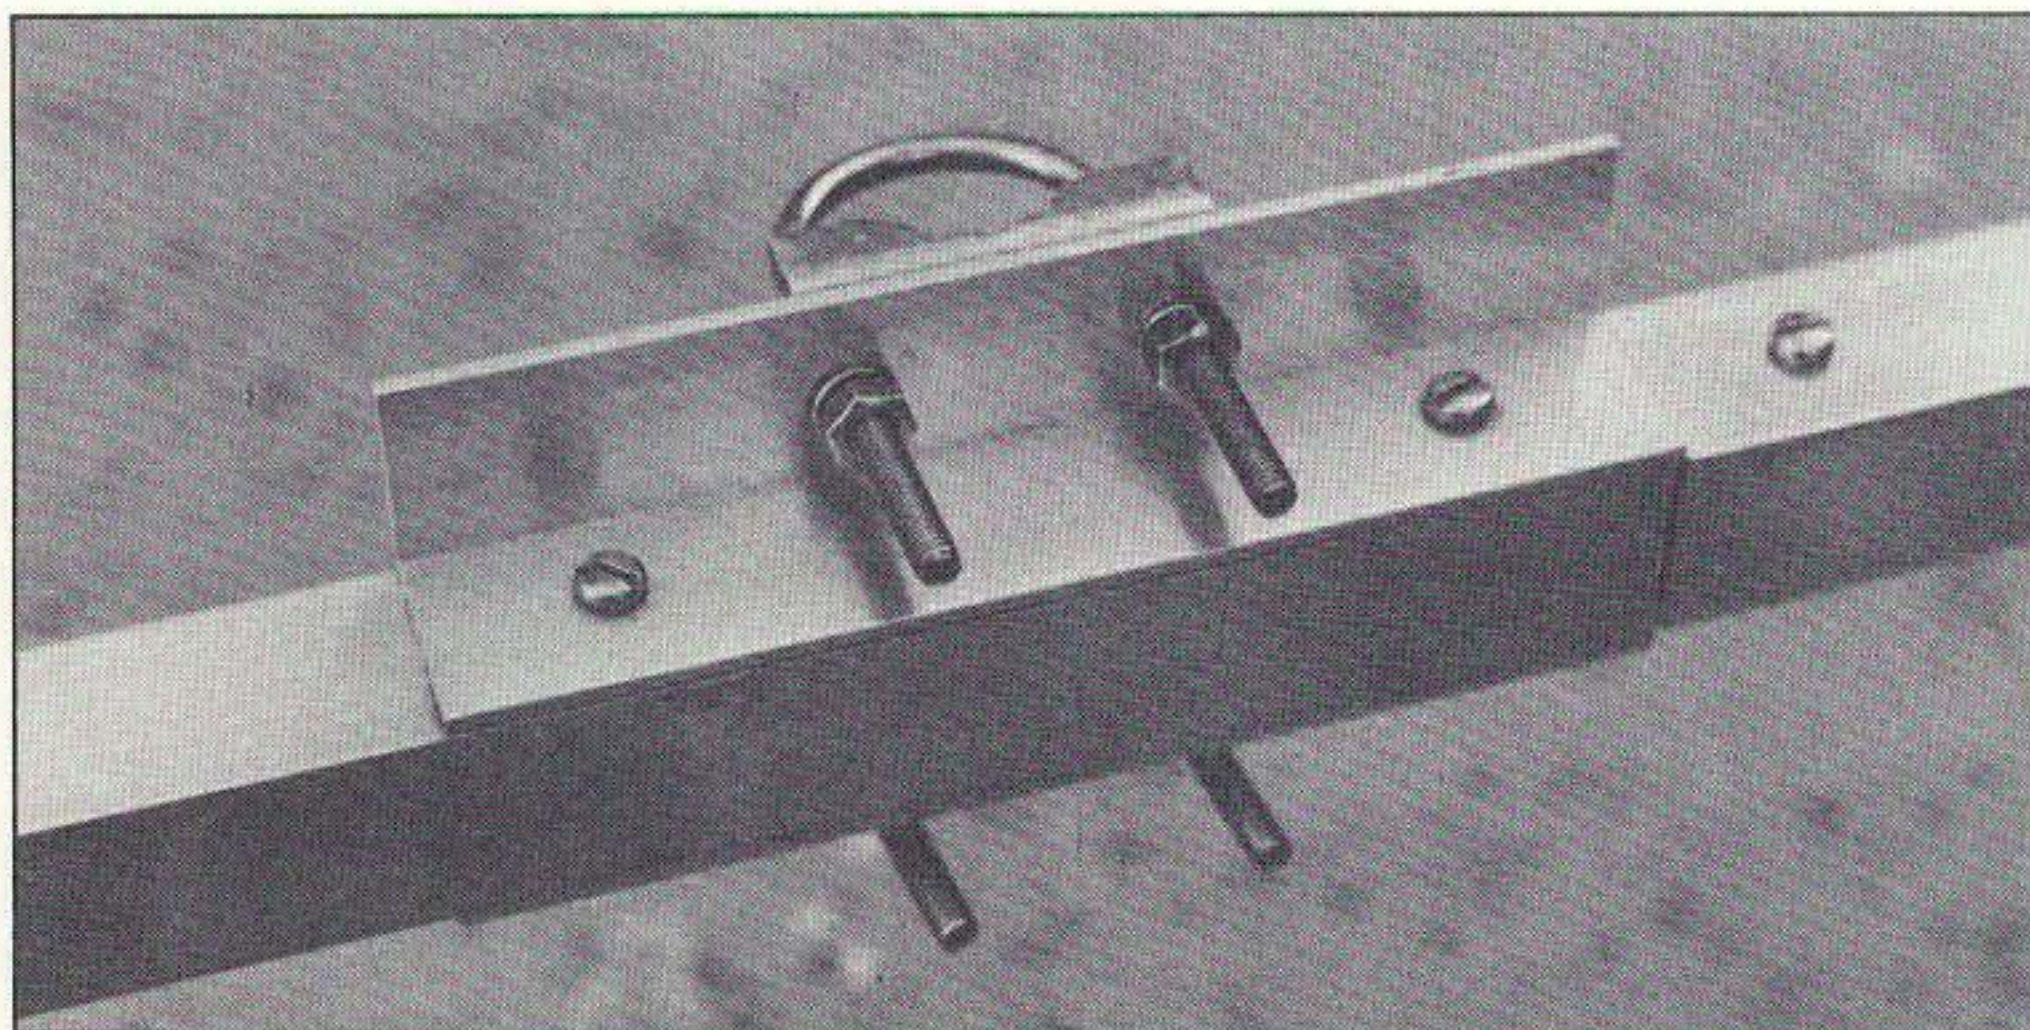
Photo D. Detail of the boom-to-mast bracket of the Sentech Q144-8. The brackets are aluminum stock, held in place by two stainless steel machine screws each. The screws are threaded into tapped holes in the boom.
